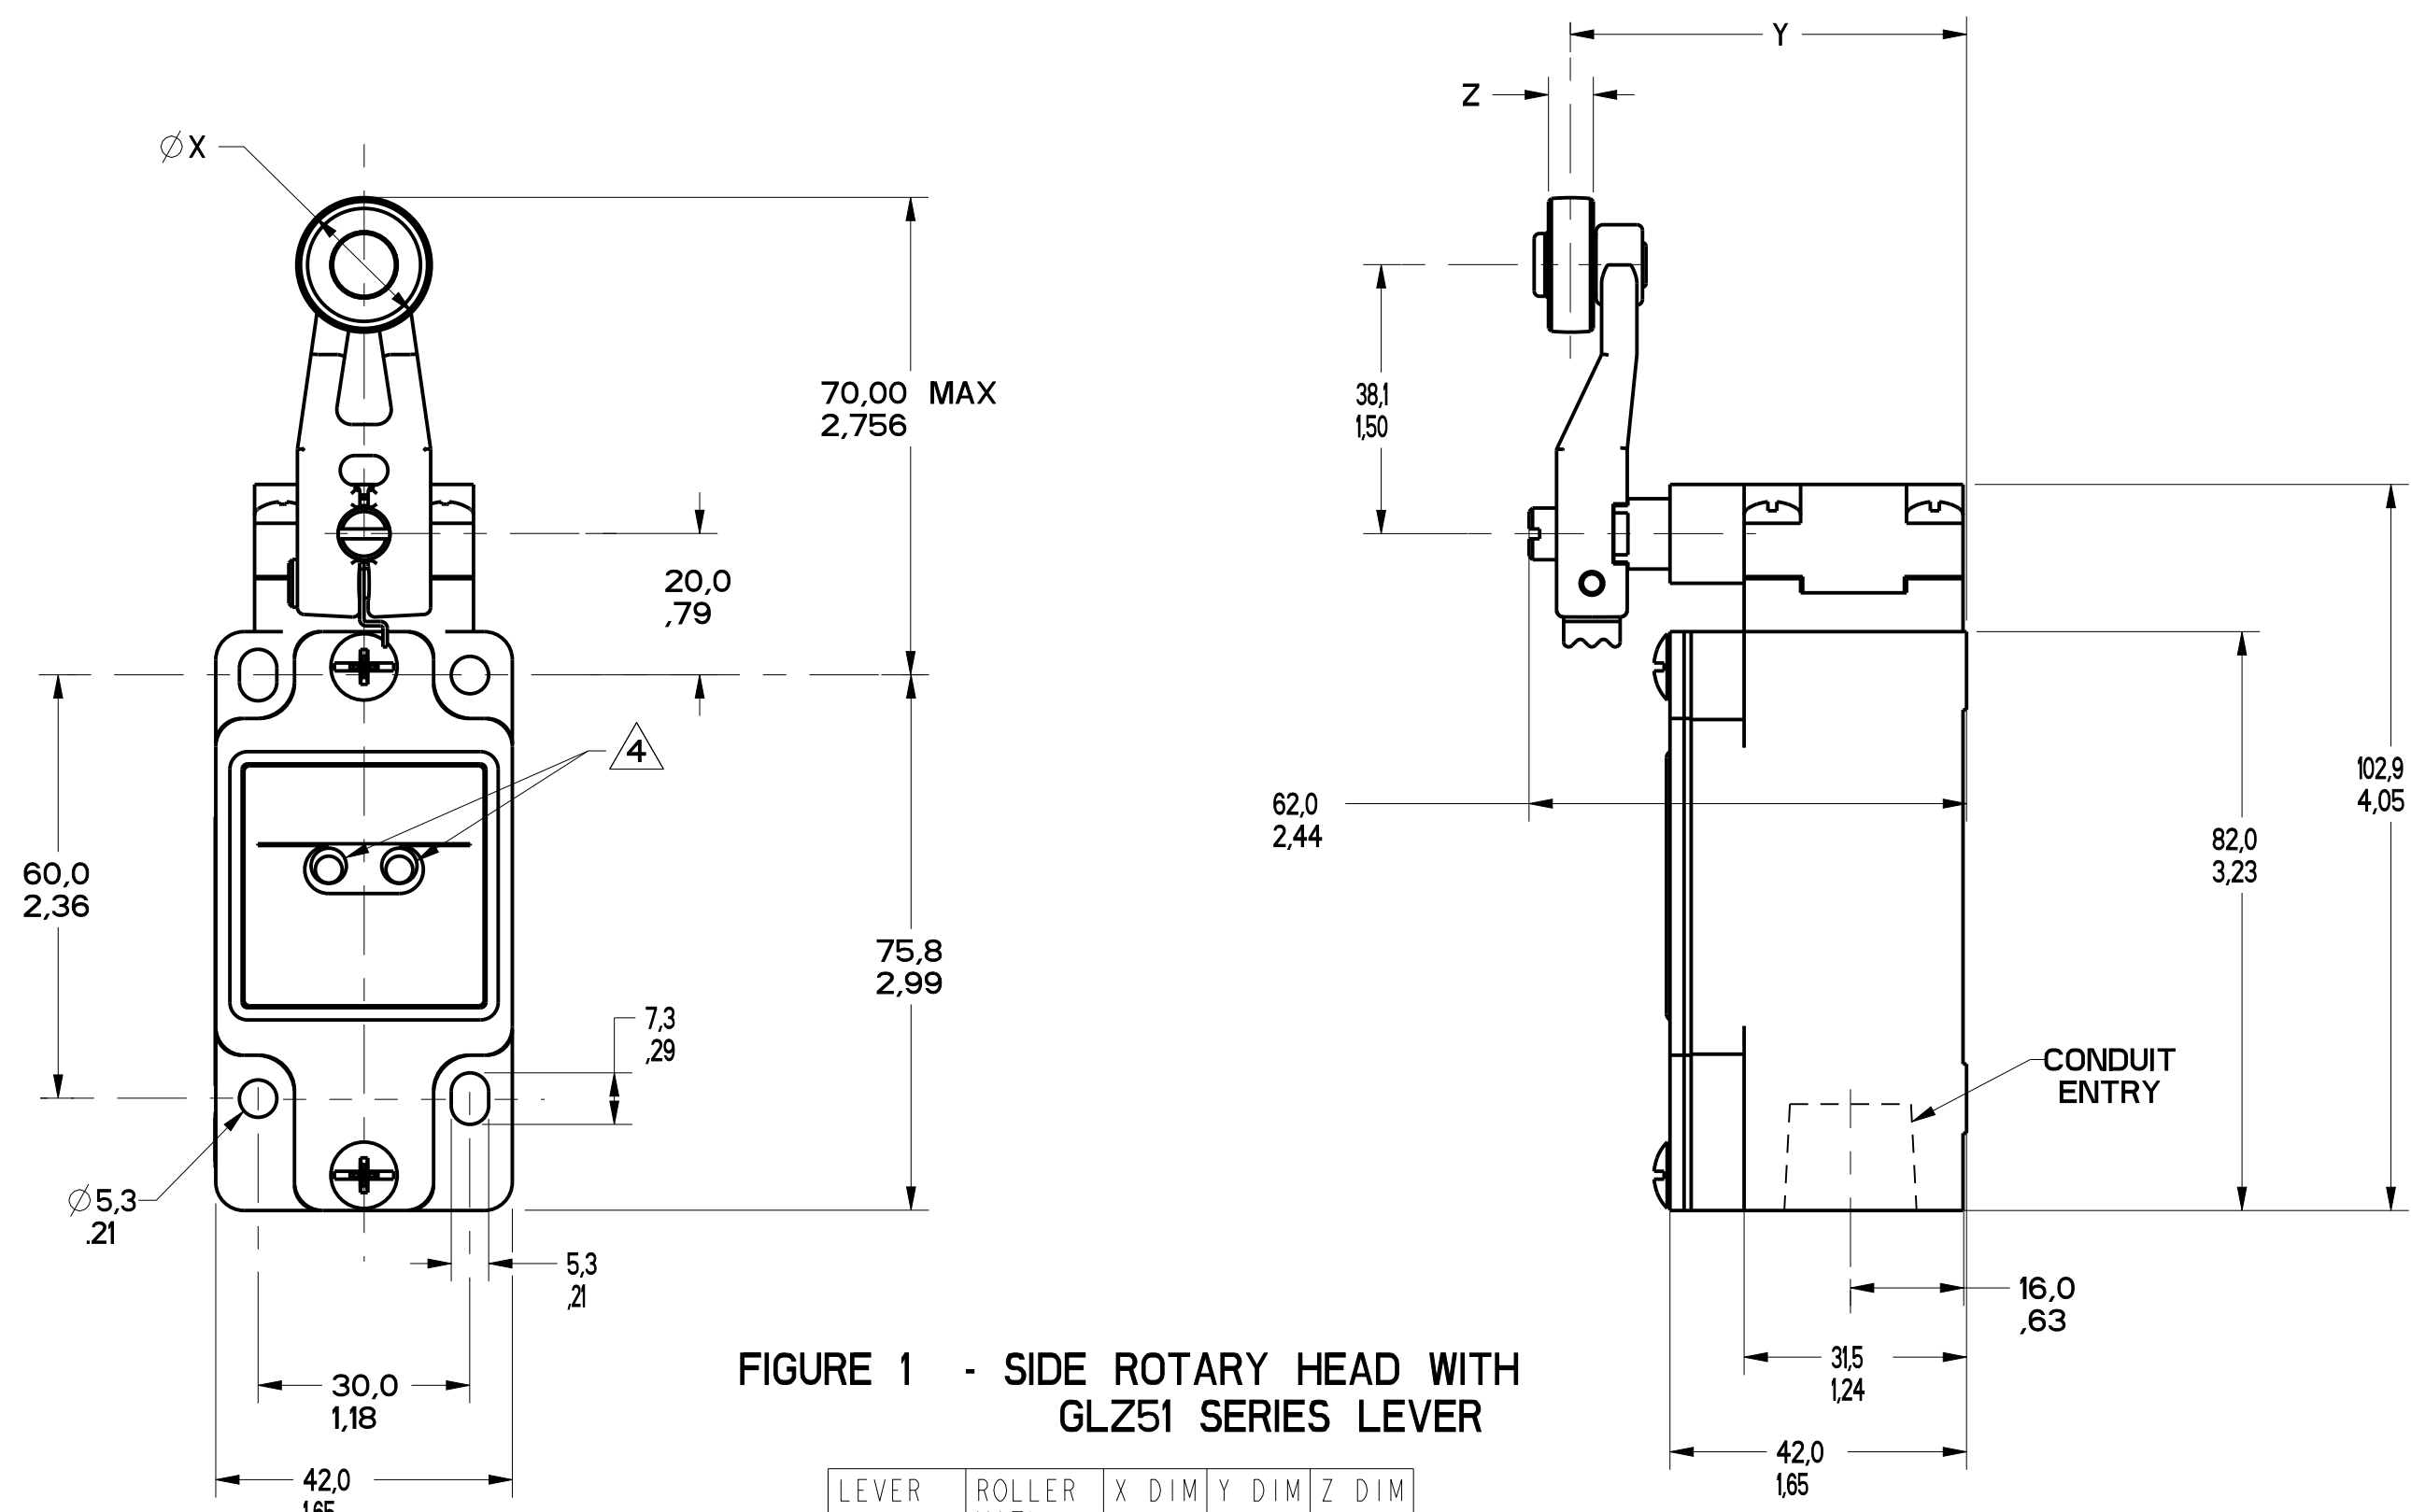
SIDE ROTARY HEAD WITH GLZ51 SERIES LEVER
